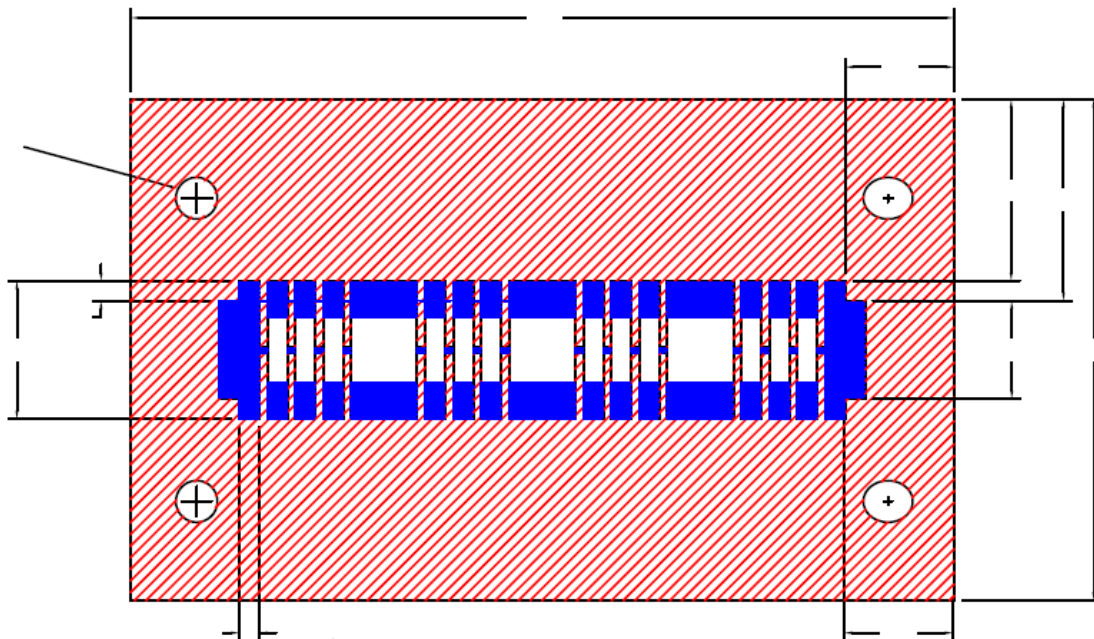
Printed Wiring Board (PWB) Layout for 8 Sets of LCP Springs
